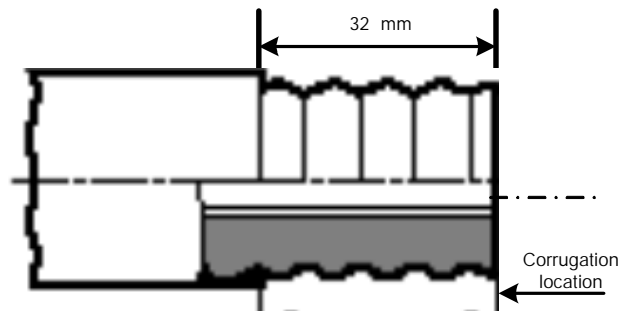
7/8" FEEDER CONNECTOR CUTTING TOOL
